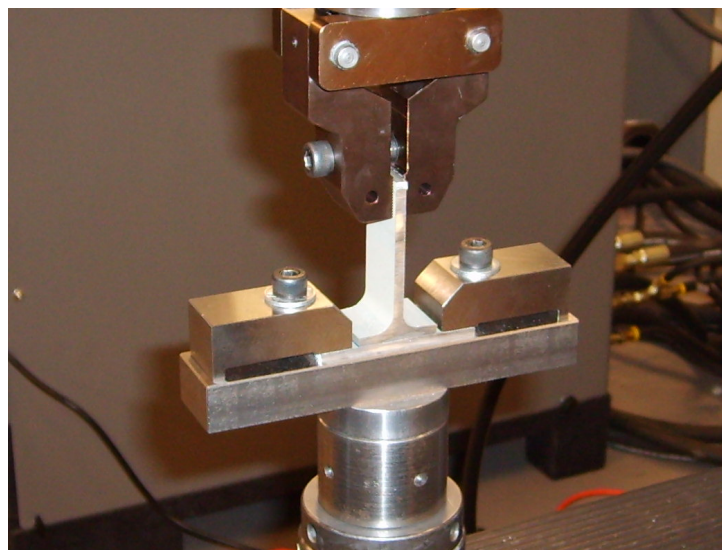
Arrangement for tensile testing of weld coupons. Top-skins are clamped via ear clamps.
